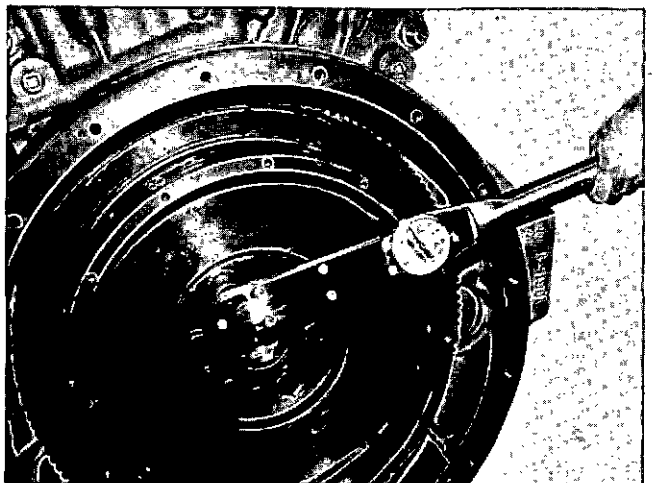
, V414180. Tighten flywheel capscrews
